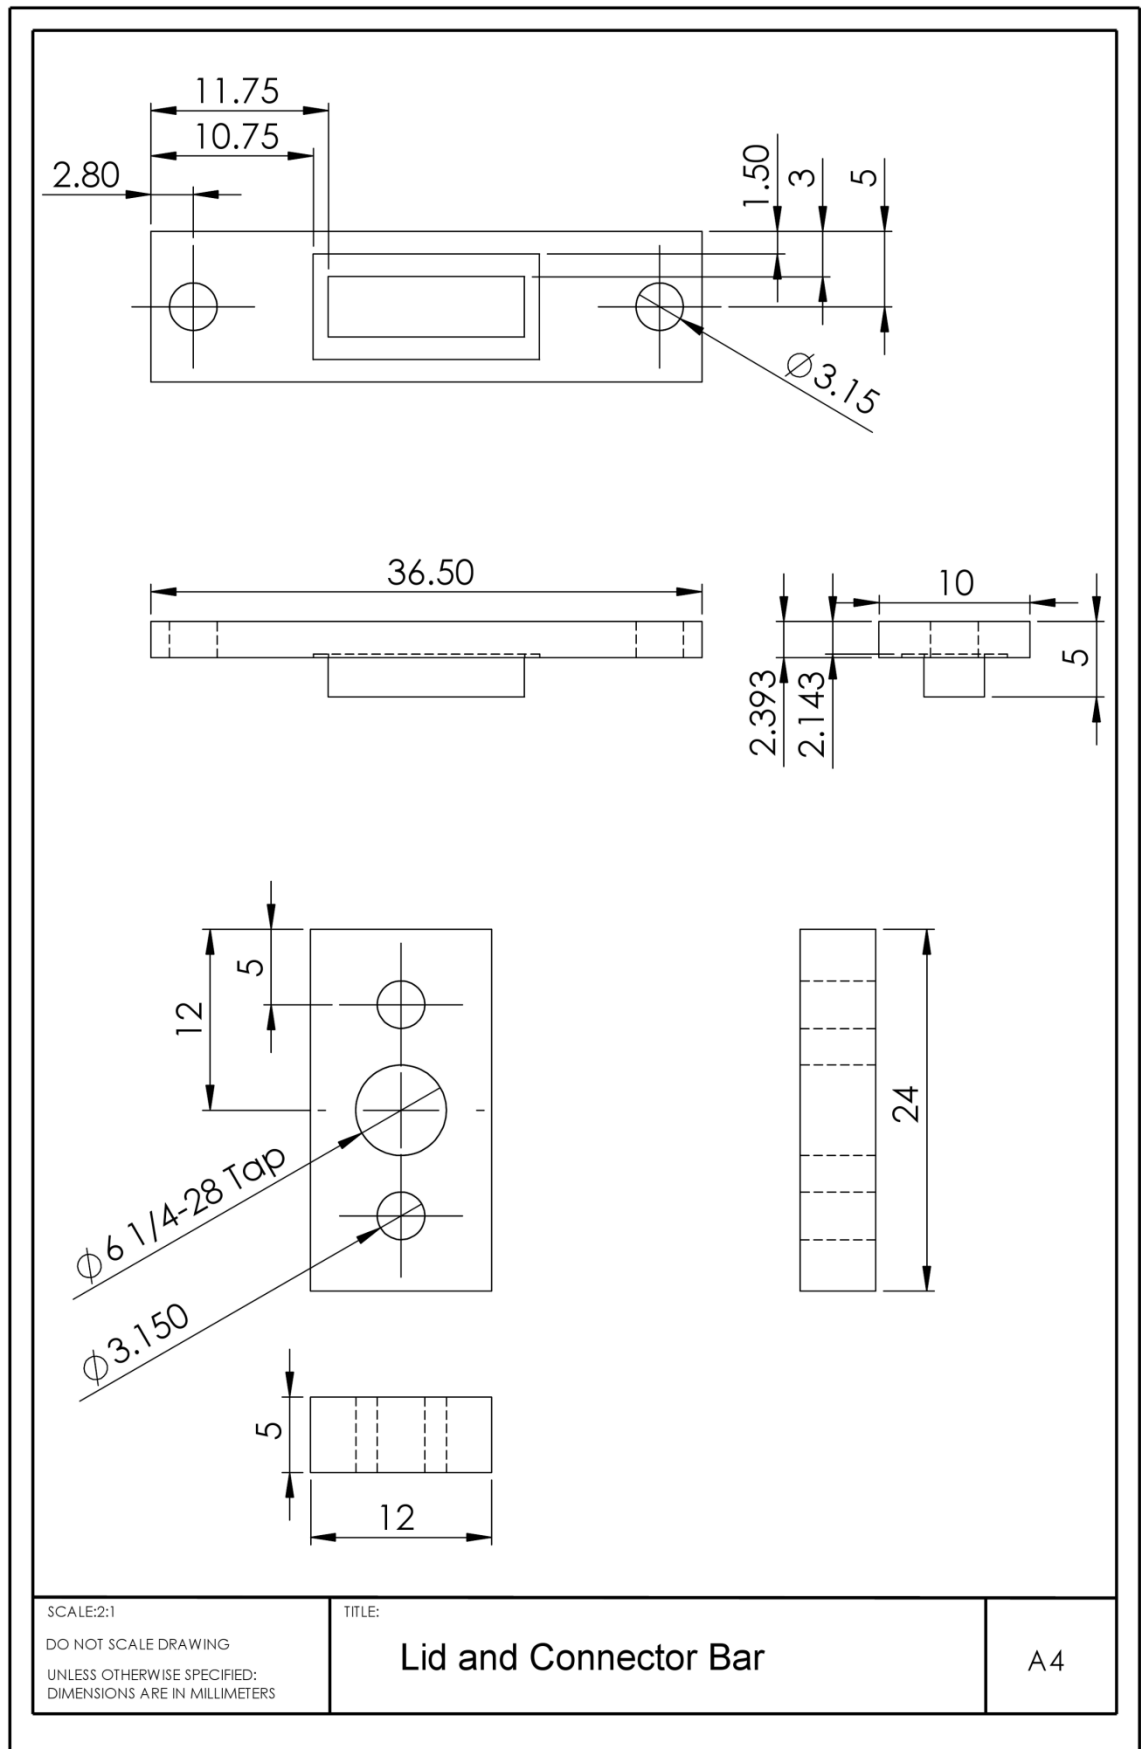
Technical drawings of prototype lid & connector bar.
